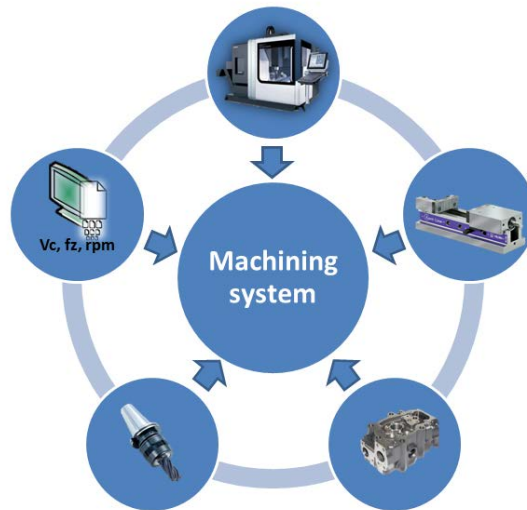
Various modules that constitute a machining system. Starting from top in the clockwise direction they are: machine tool, fixture, workpiece, cutting tool and cutting process.
